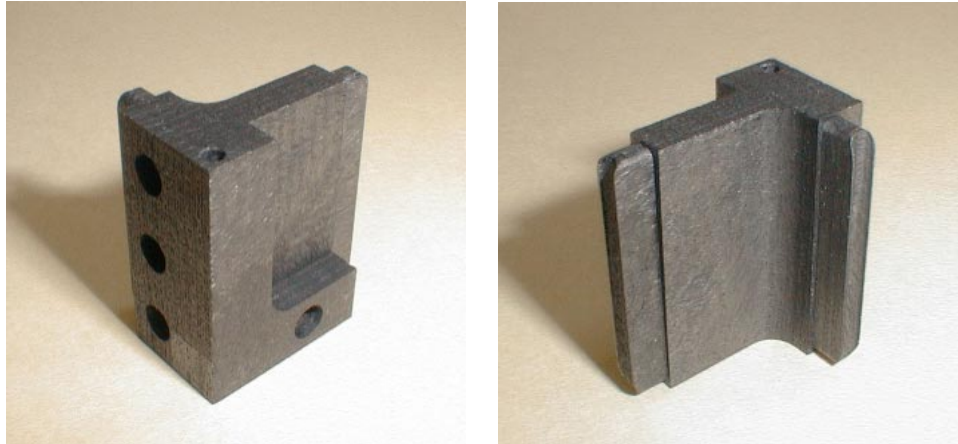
Prototype Concept 2 corner piece, milled from resin impregnated 3D CC brake material.
